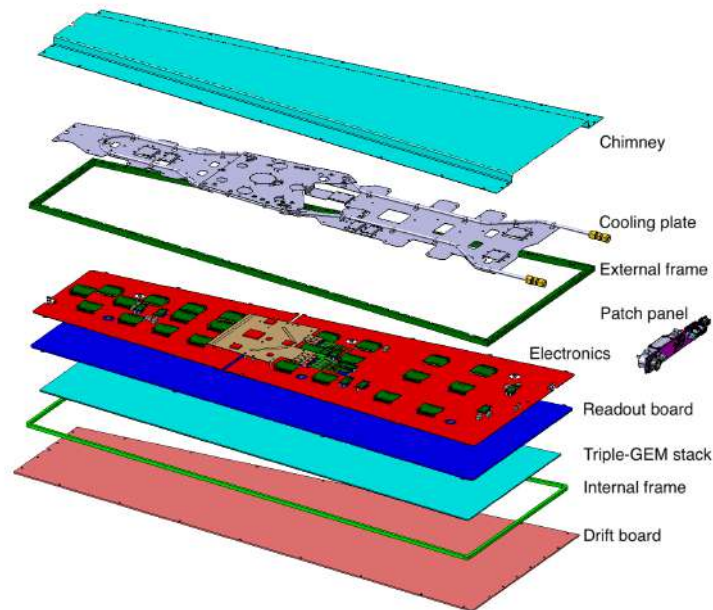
Exploded representation of a fully equipped GE1/1 detector [65].
